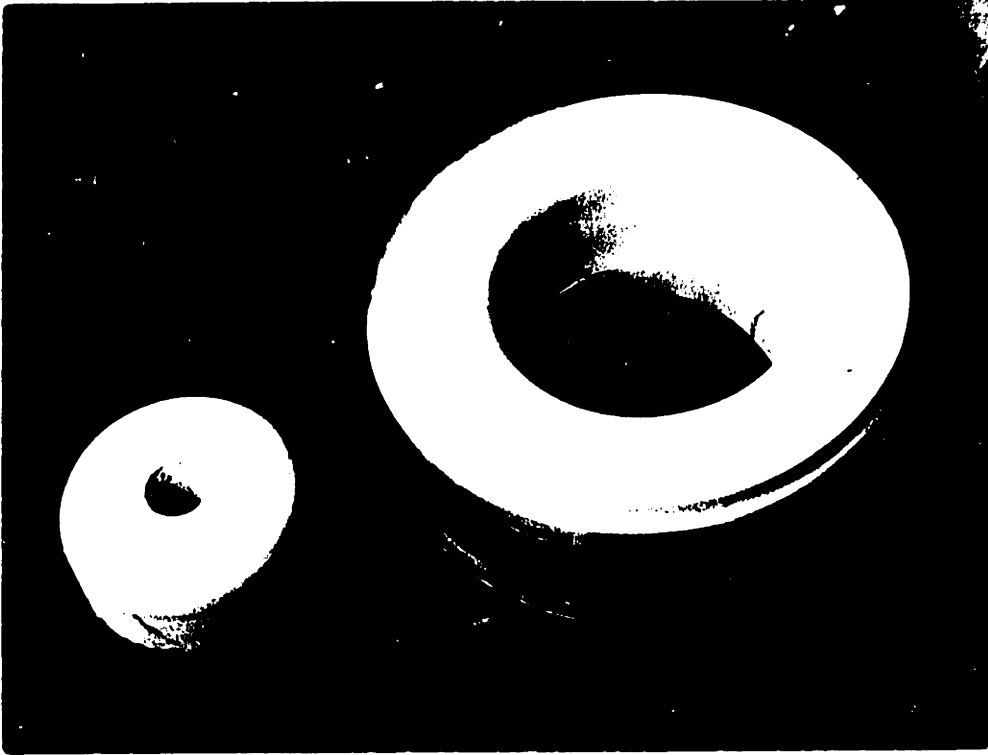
Top gypsum mold and upper core for rotor-hub molding
